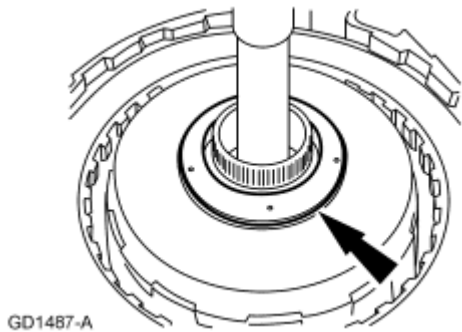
Reverse/Overdrive Sun Gear & No. 7 Shell Thrust Bearing
